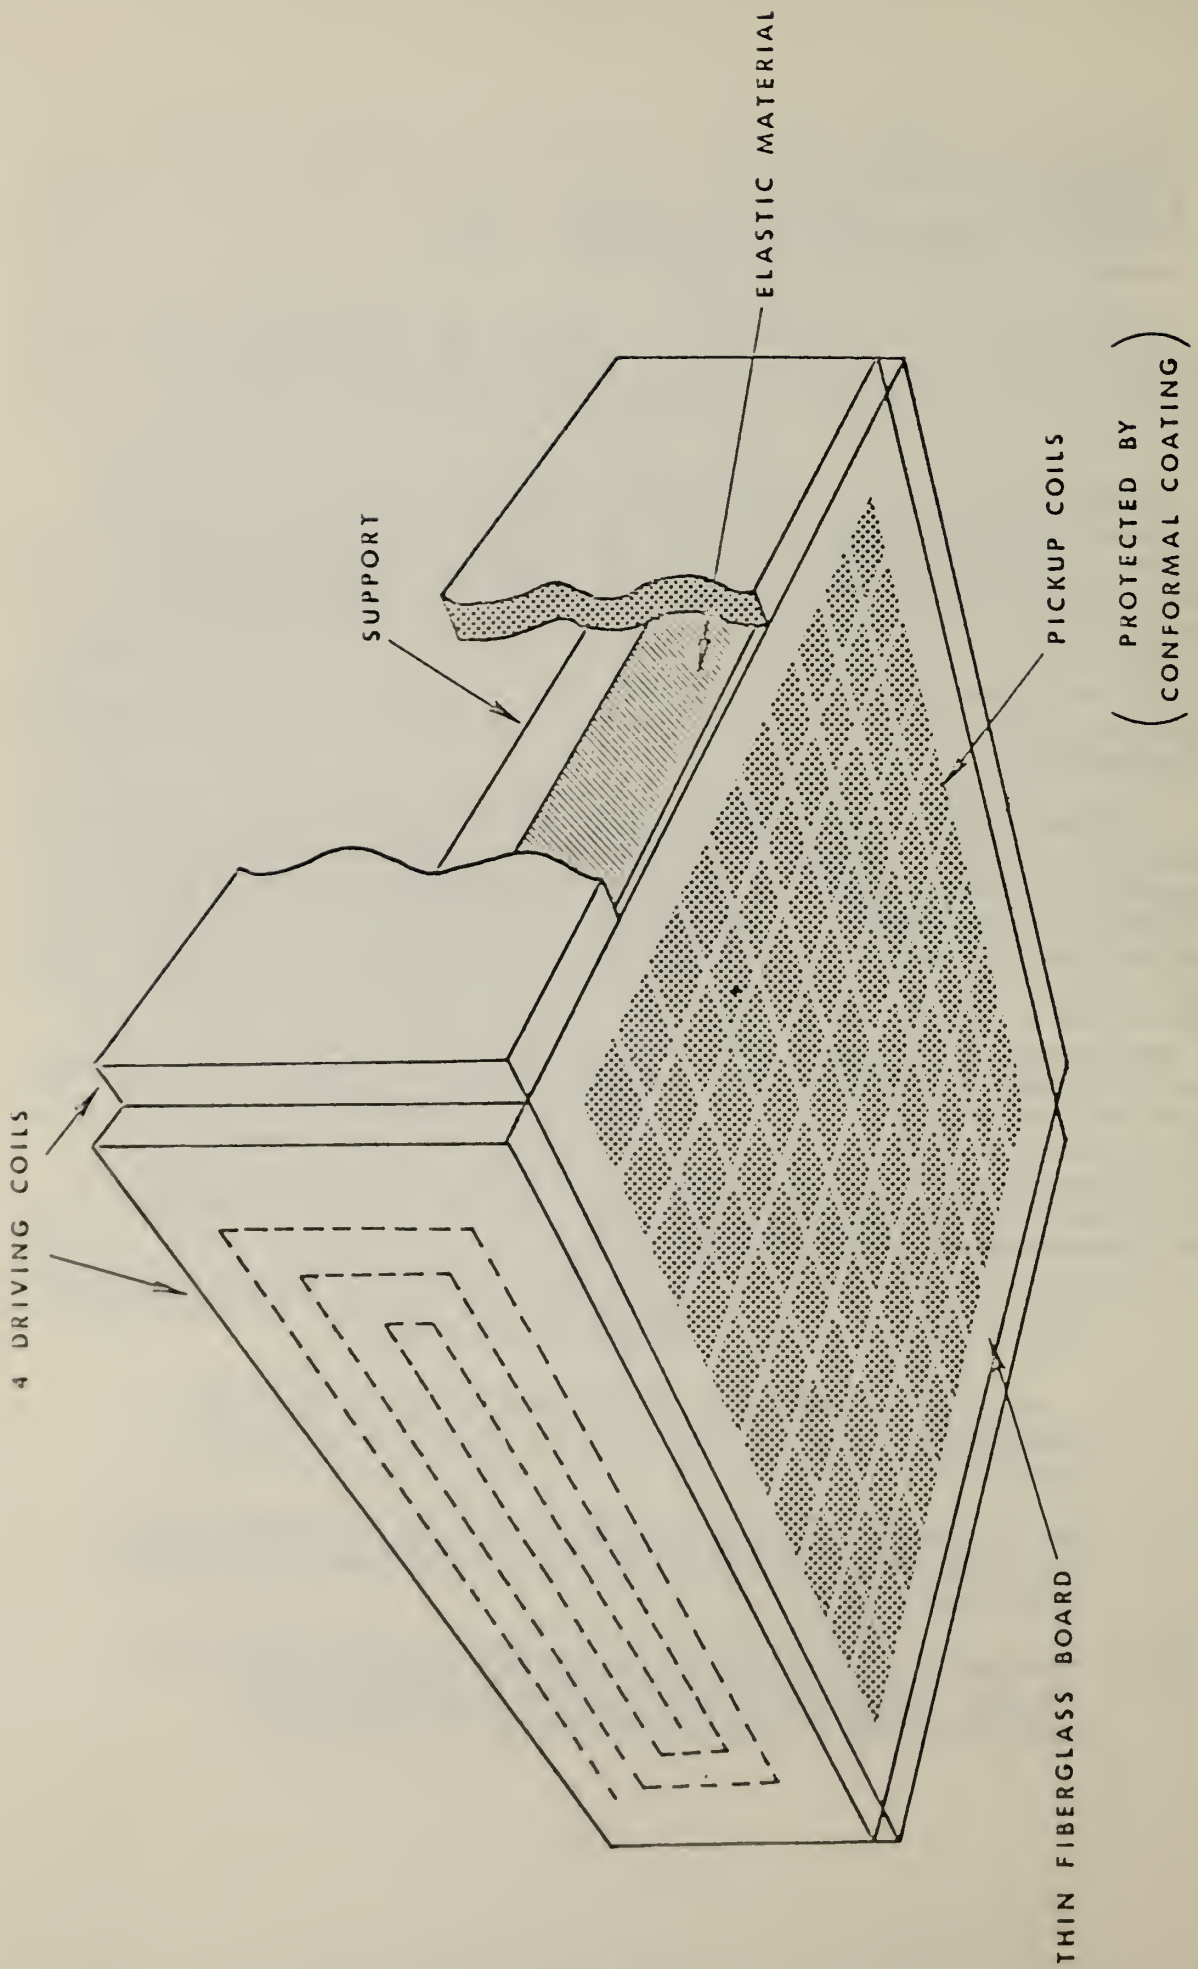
PROTOTYPE PROBE ASSEMBLY FOR THE EDDY CURRENT IMAGING SYSTEM
